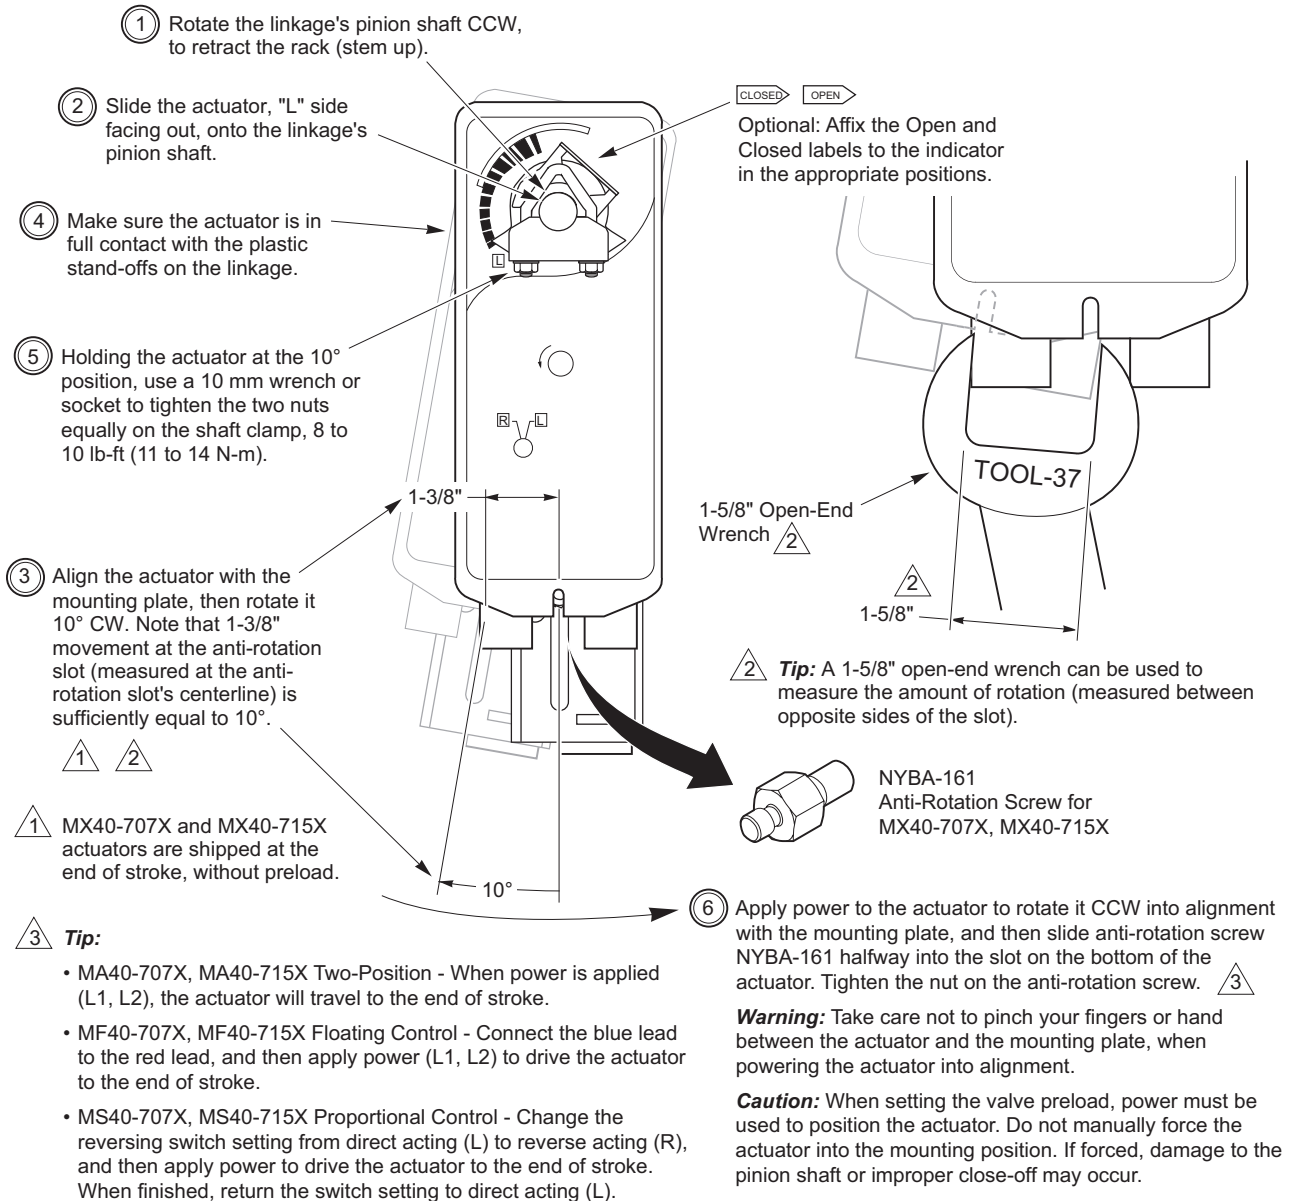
Mounting MX40-707X or MX40-715X and Setting Up Actuator/Linkage/Valve Assembly.
